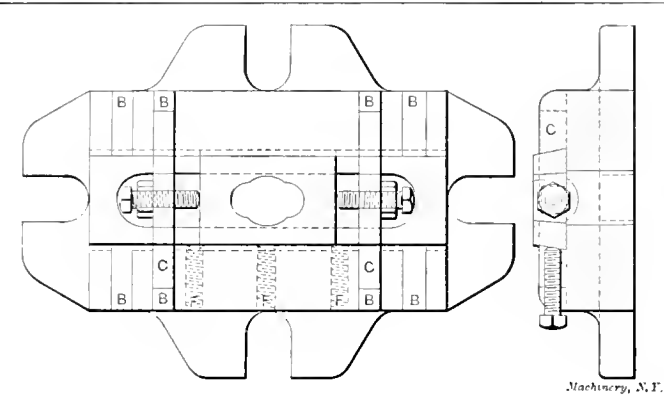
Die-bed of the Dovetailed and Side Set-screw Type, also secured by End-thrust Set-screws
